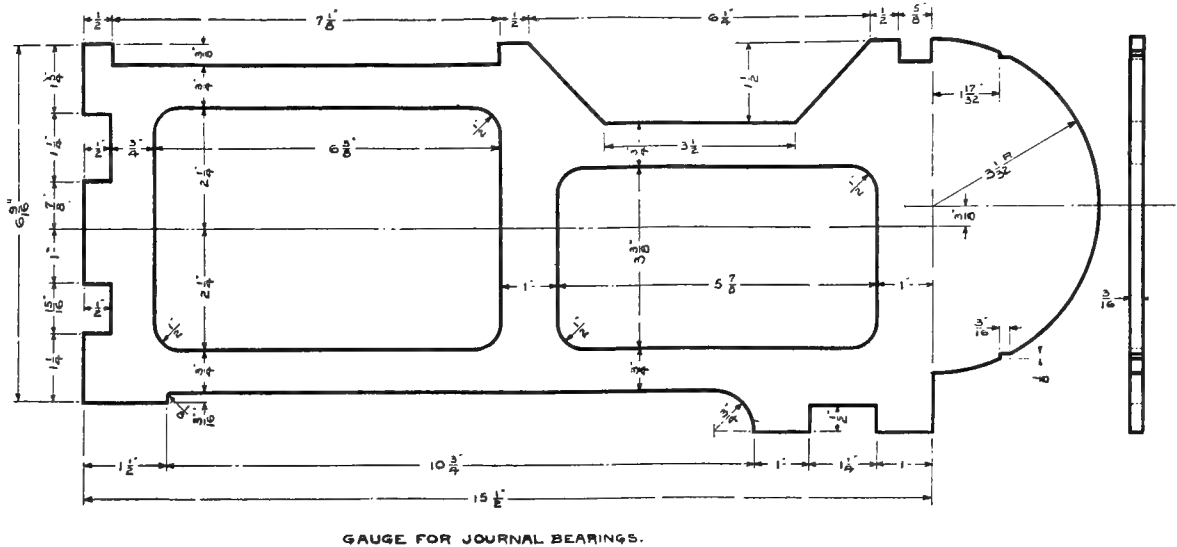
Gage for 6 in. by 11 in. Journal Bearings. (M. C. B. Sheet 14A.)
